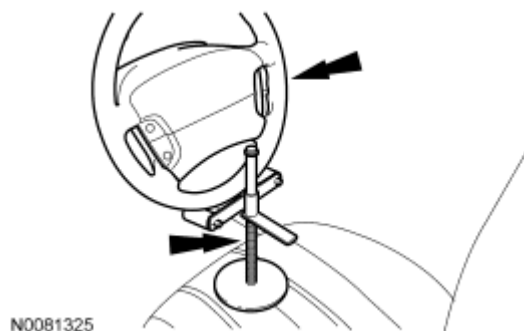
Holding Steering Wheel In Straight-Ahead Position Using A Suitable Holding Device
